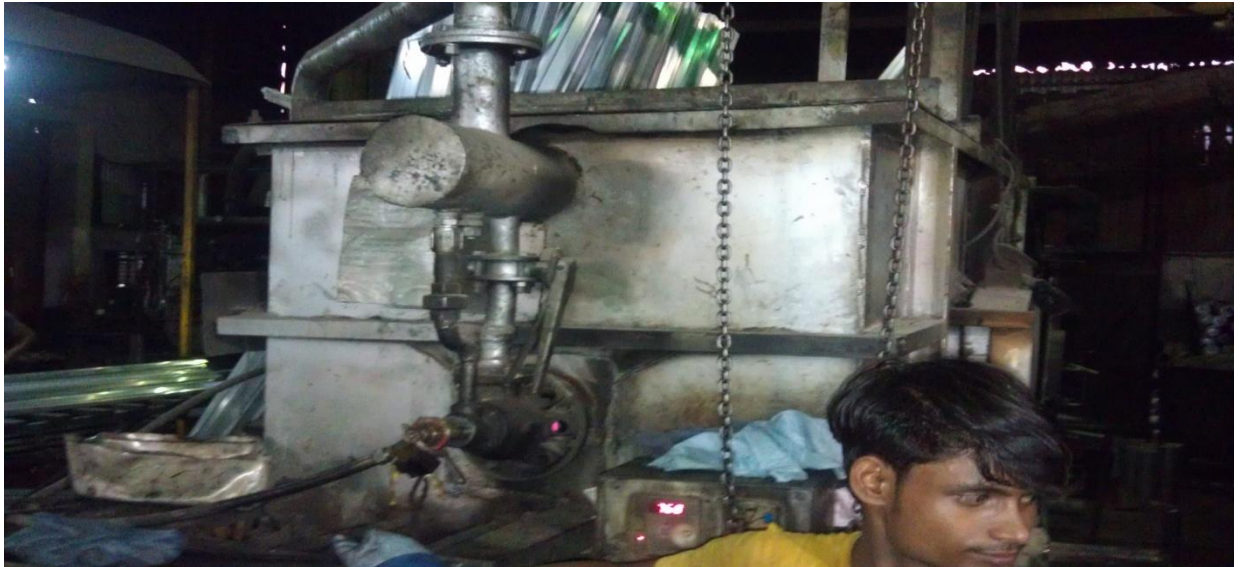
Hot top Billet Casting System [Courtesy by: VALCO Steel Ltd. Chandigarh]
